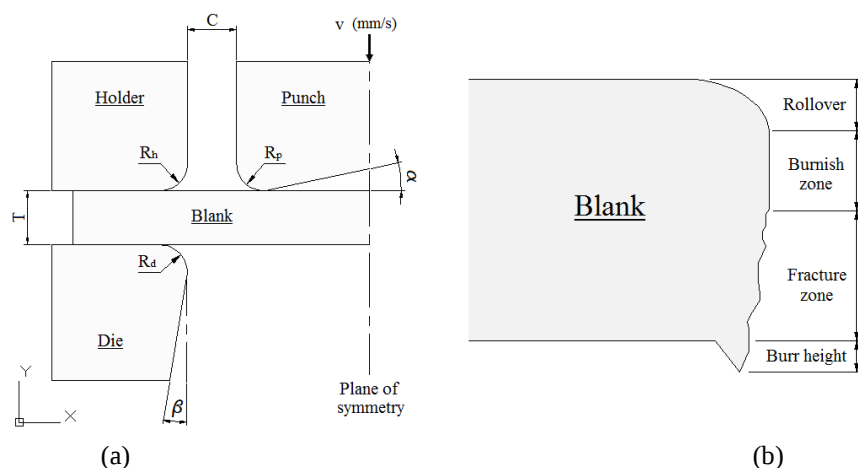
Sheet blank process: (a) tooling parameters and (b) sheared edge.
